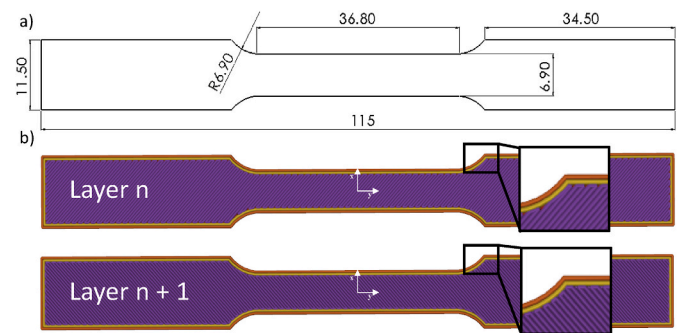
Specimen produced by MEX: (a) Geometry and main dimensions in mm (pre sintering); (b) Printing strategy of two sequential layers N and N+1 with rectilinear infill pattern.
